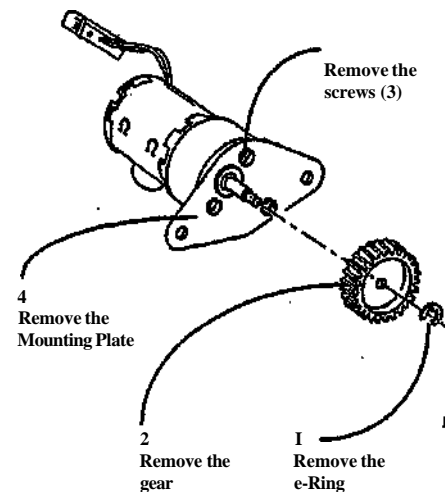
Removing the Cartridge Drive Motor from the Mounting Plate
